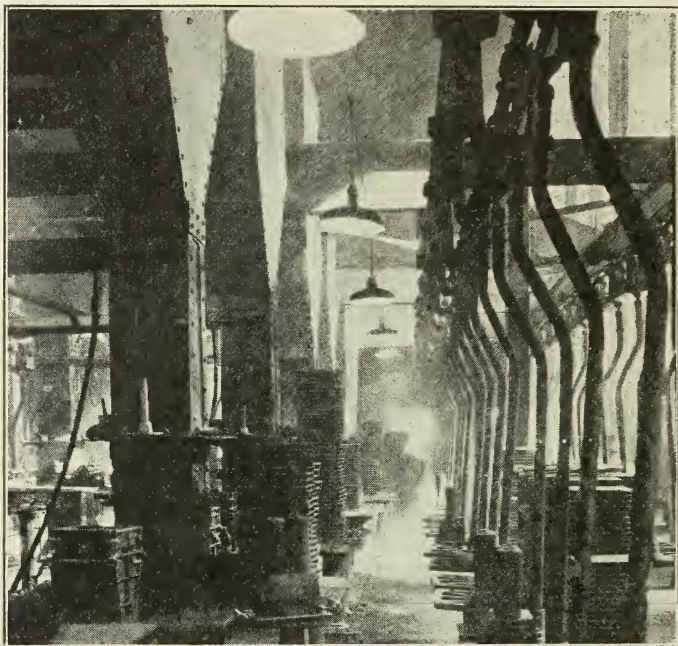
ONE OF THE CONVEYORS EMPLOYED IN THE COREROOM
